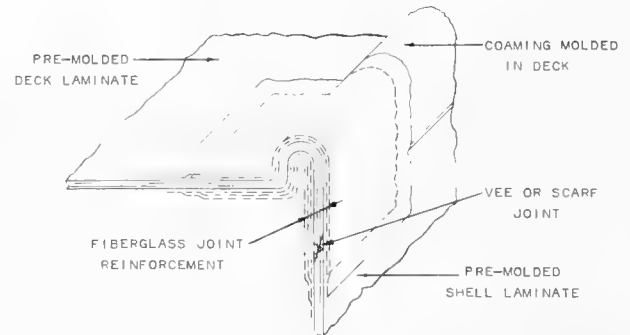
Deck Edge Connection - Molded in Deck Edge Coaming with Joint in Shell
